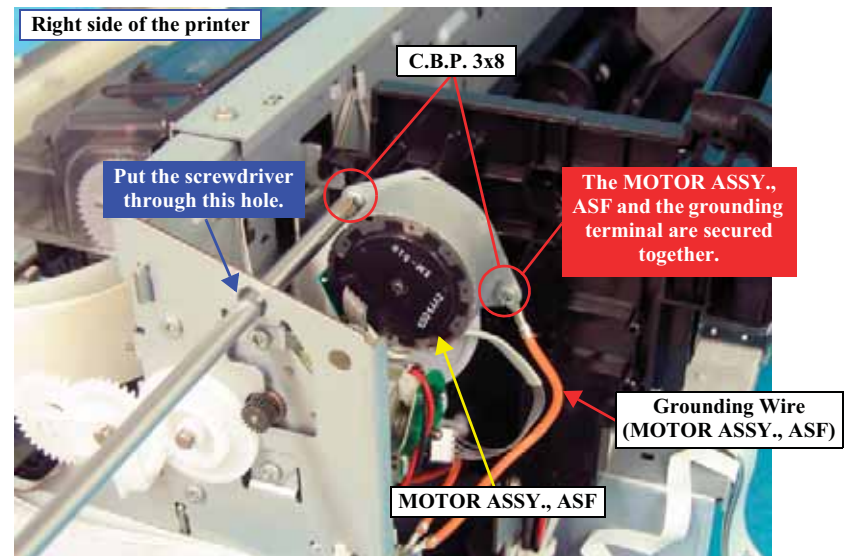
Removing the screws from the MOTOR ASSY., ASF
